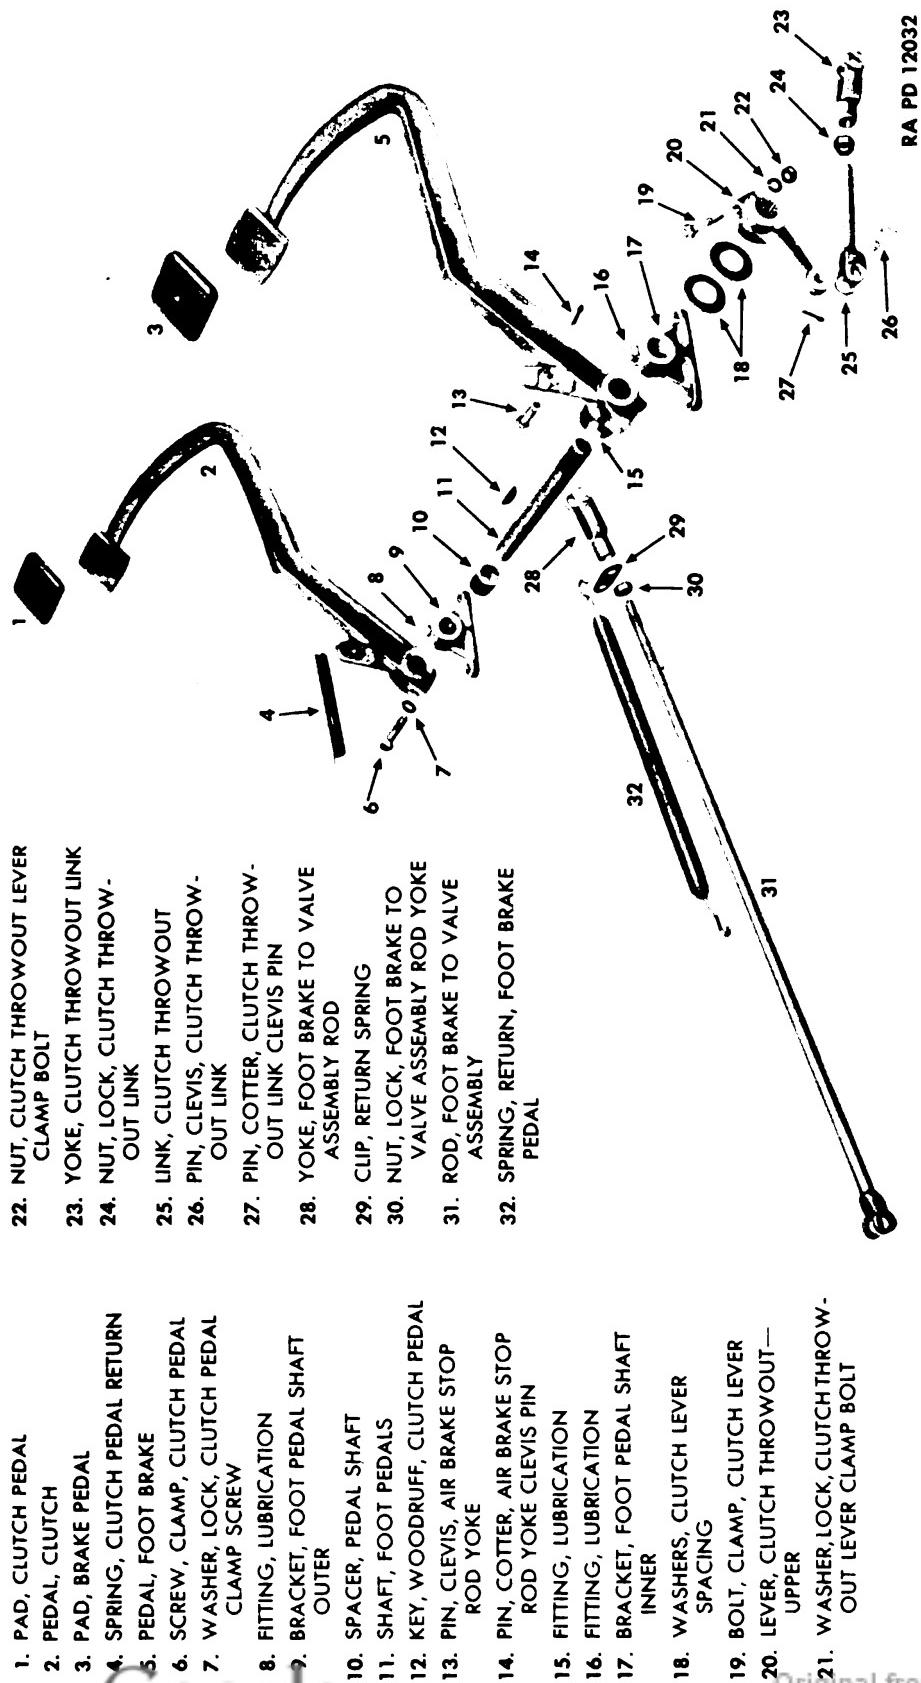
Exploded View of Clutch and Brake Pedals with Linkage
